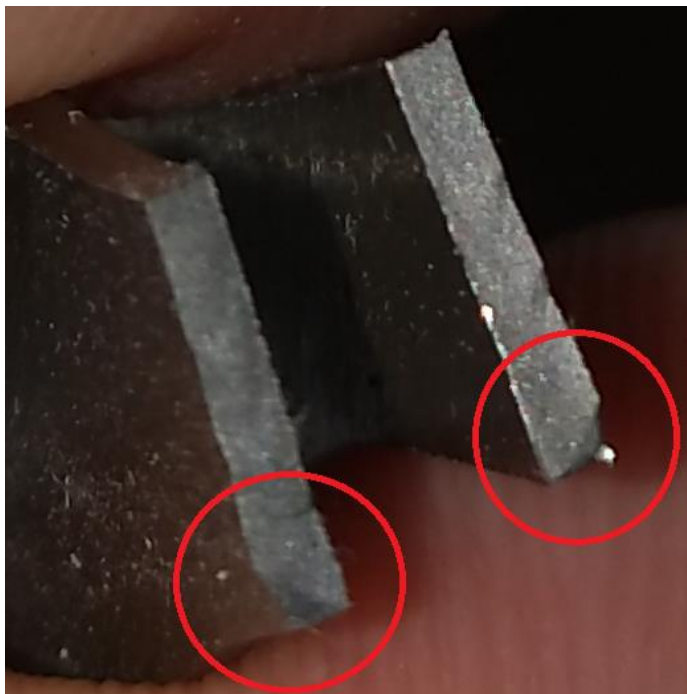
Front View of Fracture Geometry of a LB-250 Fatigue Specimen
